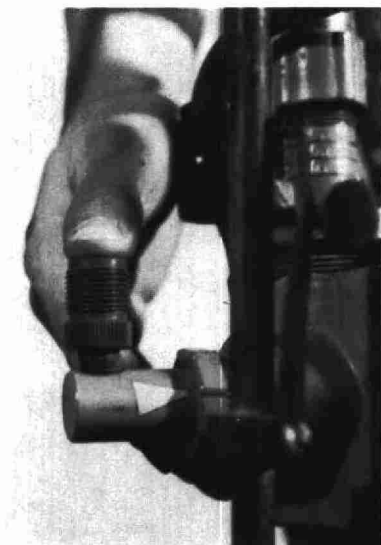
Place thumb over hole in fitting, hold for a moment.
